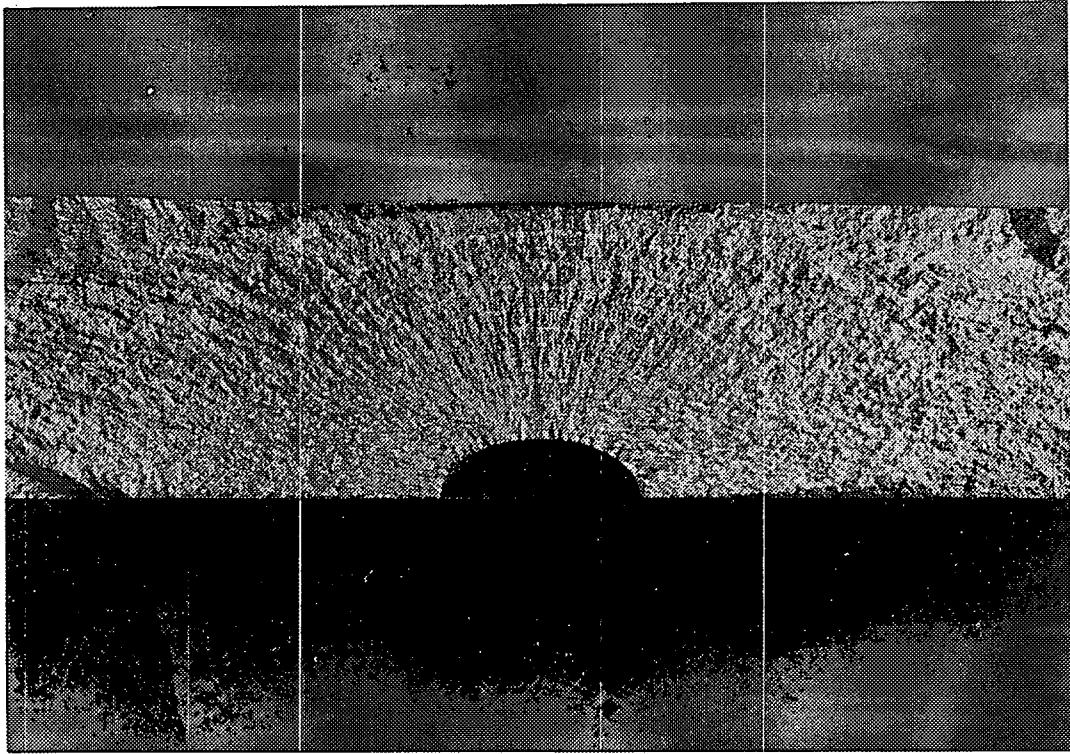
Typical fracture surface with white bands of marker loads (specimen PCA2).
